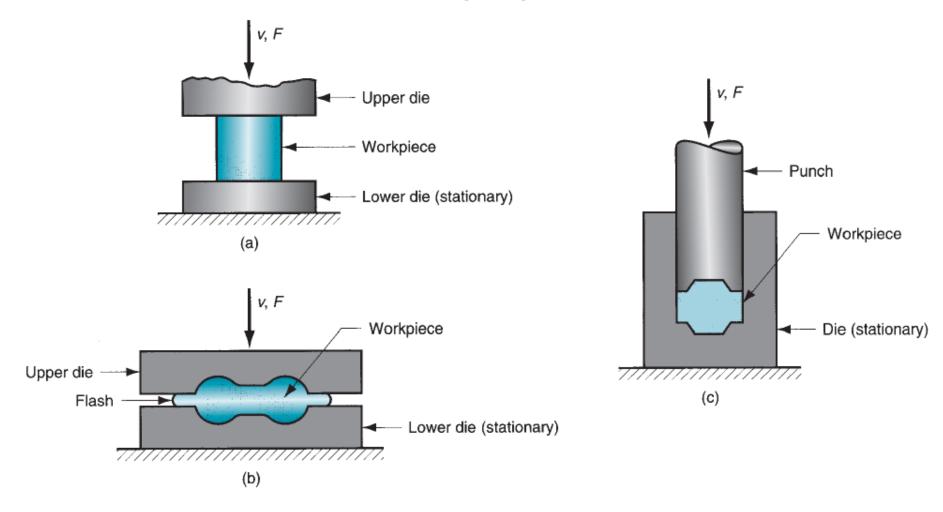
Three types of forging operation: (a) open-die forging, (b) impression-die forging, and (c) flashless forging.
